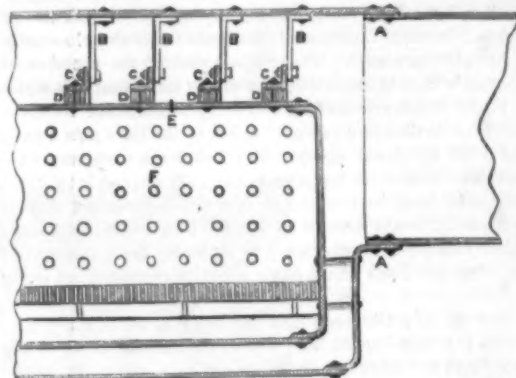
Sectional view of Fire Box, showing Stays and Crown Sheet.
